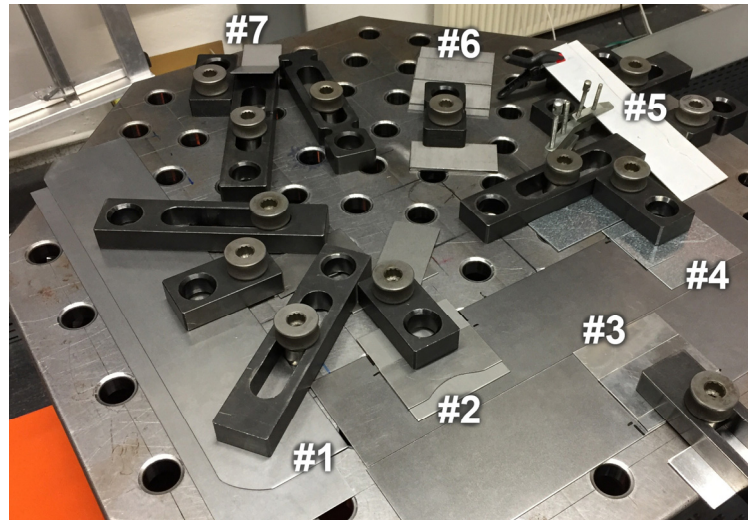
exemplary setup of different weld configurations as they can be found in hang-on part and body-in-white applications, mounted on one welding bench.
